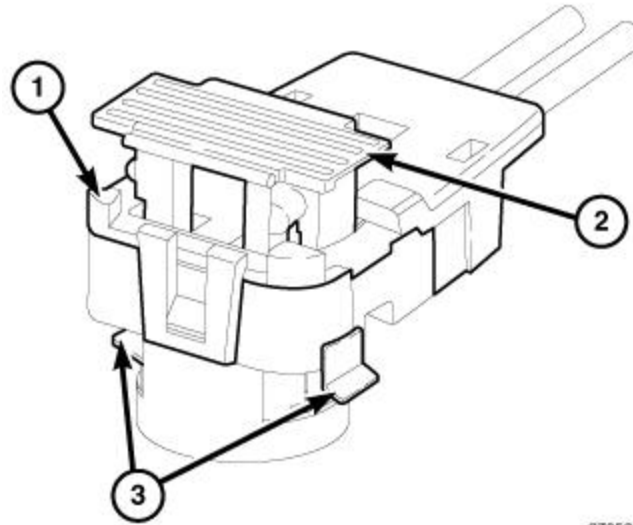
Clockspring DAB Pigtail Wire Connector Insulators, Latches & Connector Position Assurance (CPA) Lock
